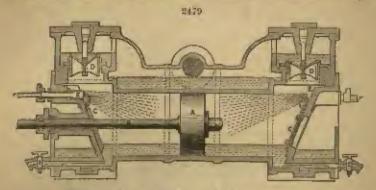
shows a compressor designed and made by the Humbuler Company near Cologne. The apparatus consists of a steam cylinder, steam, and variable expansion steam valves, a double-acting plunger with two side rods coupled to two fly-wheels two valve boxes, one at each end of plunger case fitted with i let and outlit valves. Water introduced into each plunger case serves the threefold purpose of filling the clearance spaces, expelling the air, and absorbing the heat given off during the compressing operation. The following are particulars of a machine errected at the Saarbrück Collistica. The motor is a horizontal expansion ateam-ongine—cylinder 24% in diameter, stroke 43 in, with a pressure of 30 lb of steam, and a cut-off at half-stroke; at 25 revolutions per minute 54 horse-power is developed. The compressor plunger is 164 in, dismeter and 12 ft. long. Each plunger case is 5 ft. long and 20 in. diameter; the branch at the end of each case is 33 in diameter and 5 in. in height, upon which is placed a valve cheet of enlarged diameter. The stuffing leave of each case are distant 6 ft. from each other. In this space a cross-head at tached to the middle part of the plunger and travelling in guides is connected to side rods attached to fly-wheels. With an air pressure in the receiver varying from 30 to 45 lb. per square each, the useful quantity of air compressed is stated to equal 96 per cent. of the theoretical contents of the stroke. The following are the dimensions of some of the compressors constructed by the Hummount Company:-
